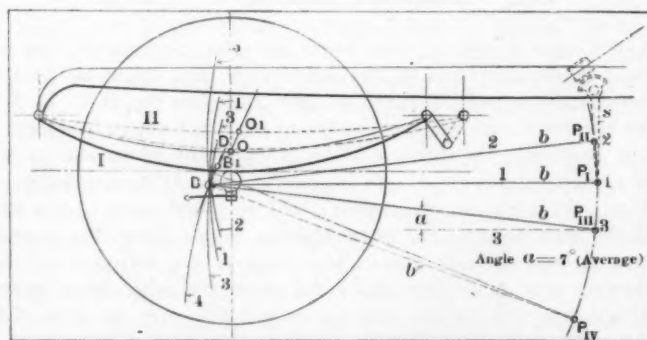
Illustrating imperfect design as a cause of wobbling steering wheels
